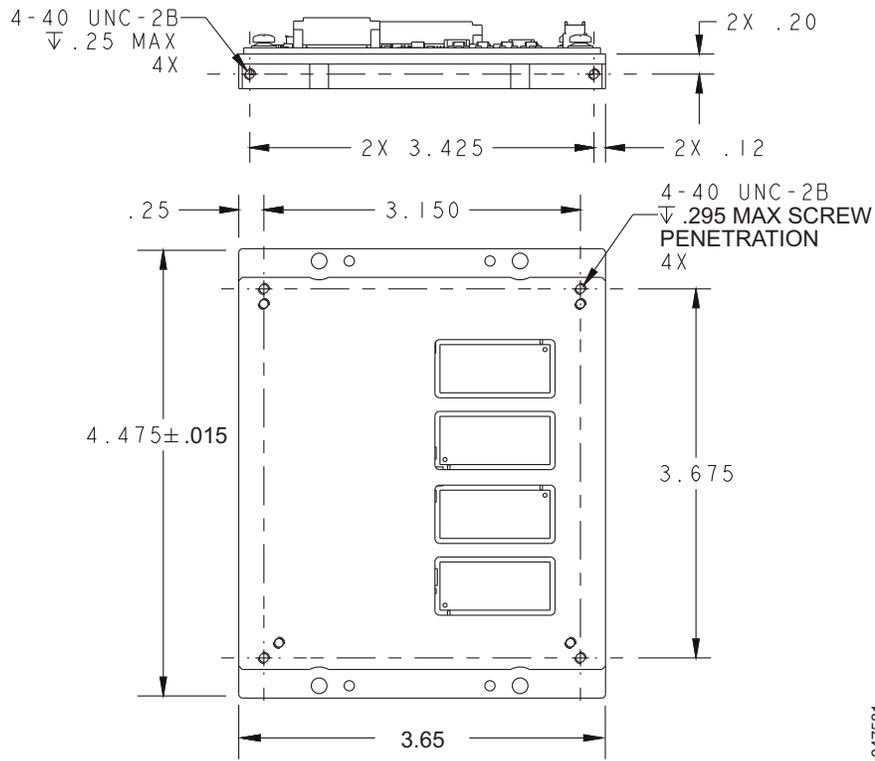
ESS-2020-16TC-NCP (Expansion Board Without Cooling Plate) – Top View
